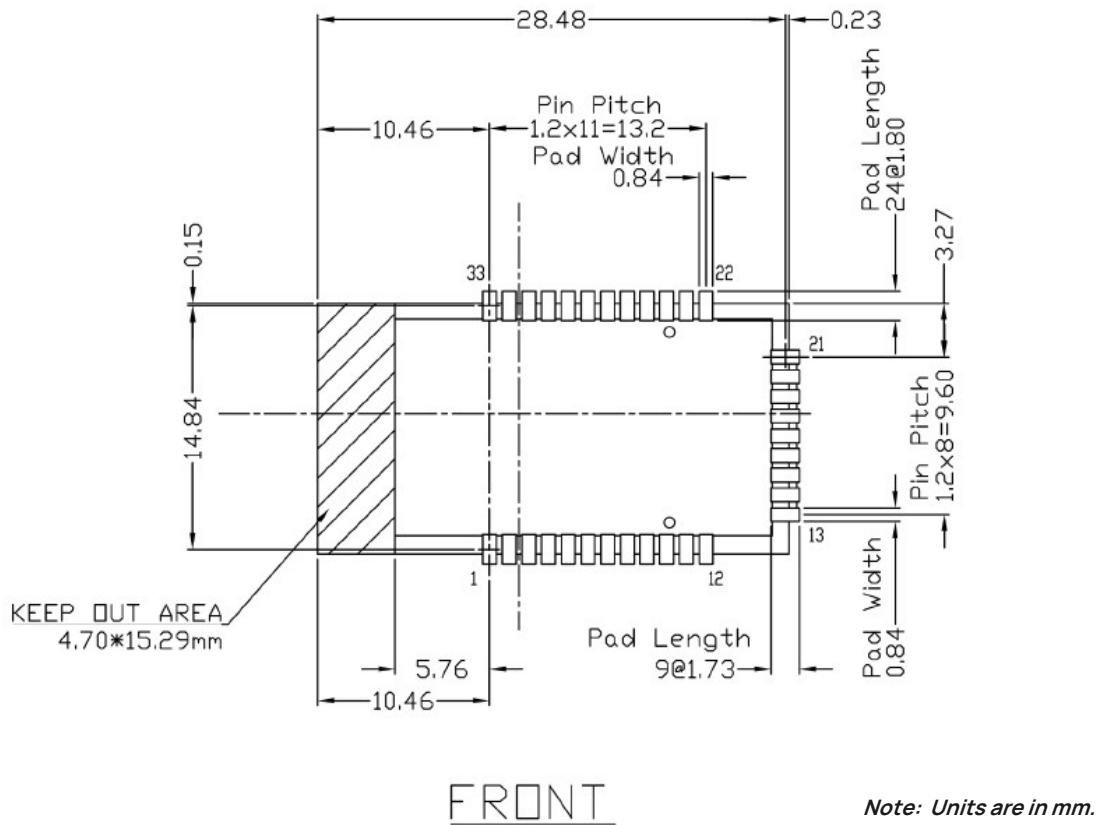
PCB Land Pattern and Antenna Keep-out for BT740-SA
